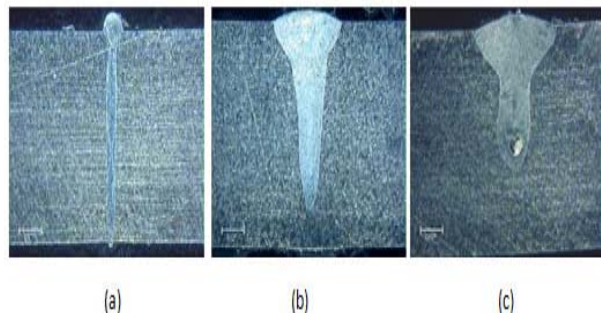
Cross sections of bead on plate welds for single mode and multimode
